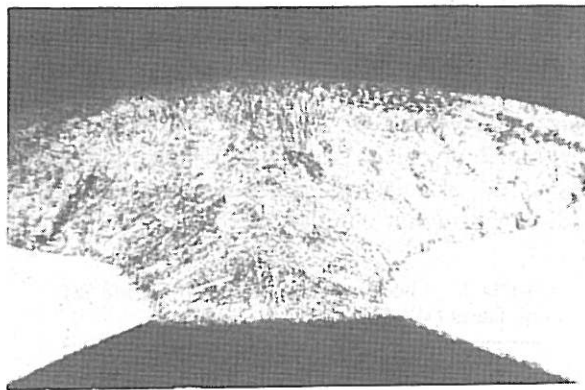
Fusion weld having dendrite structure $\times 65$.
